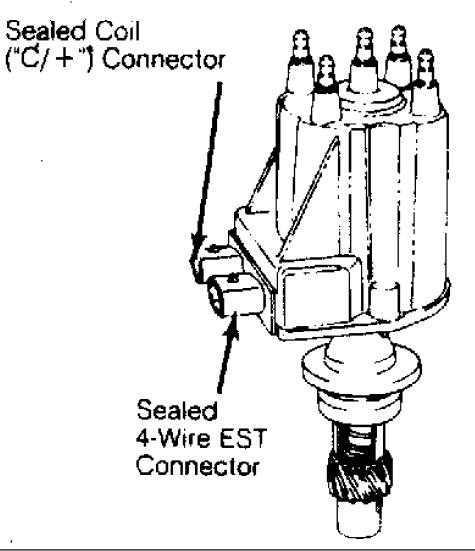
HEI/EST Distributor w/Sealed Module Connectors, External coil system shown. Courtesy of General Motors Corp.
